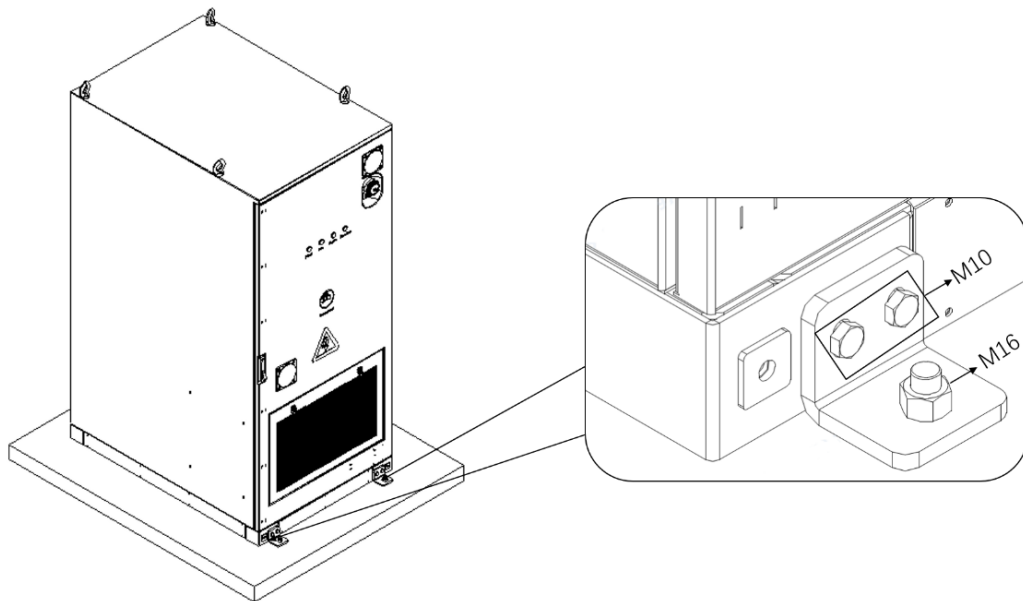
Diagram of fixing cabinet on the concrete foundation
